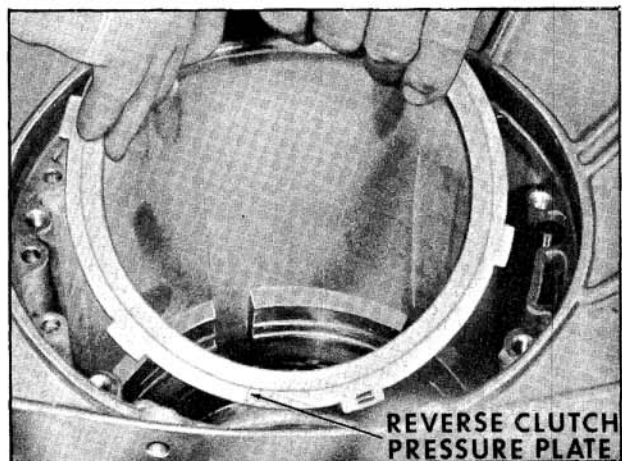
Removing Reverse Clutch Pressure Plate
